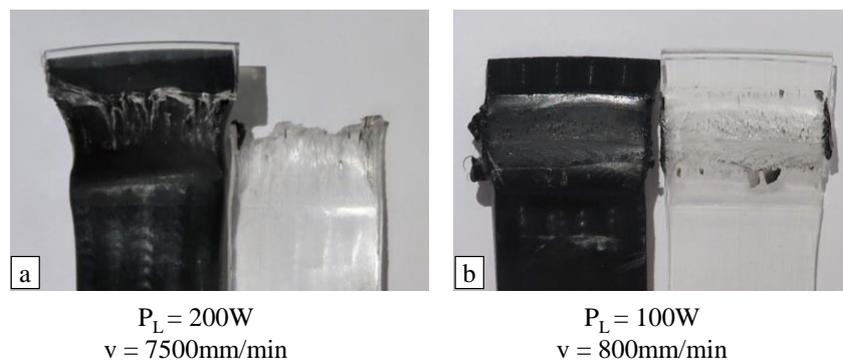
Exemplary fracture appearance for an ideal welding parameter set (a) and a parameter set leading to overheating (b).
